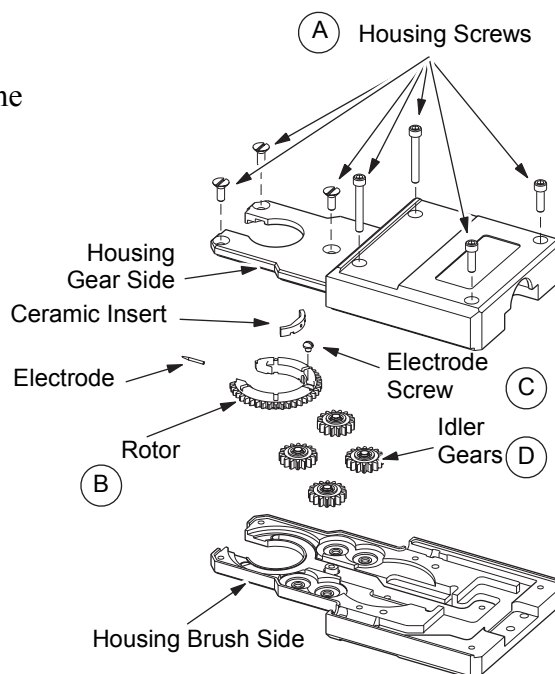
Removing Series 8 Micro Weld Head Components for Cleaning
